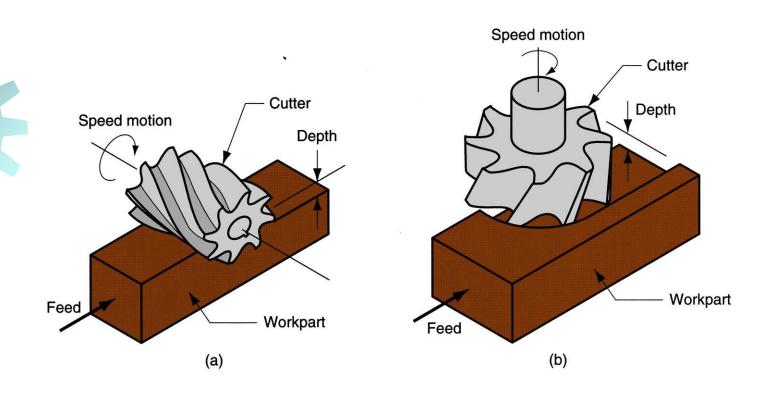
Two forms of milling: (a) peripheral milling, and (b) face milling.
